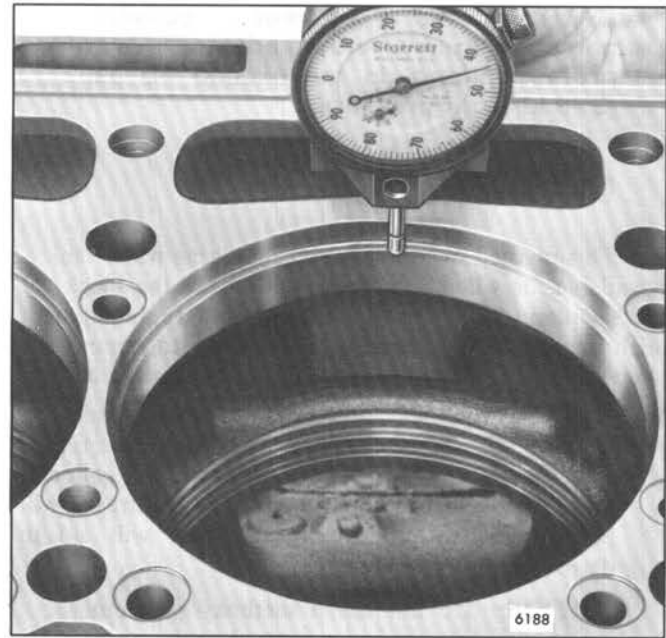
Checking Depth of Counterbore with Tool J 22273
